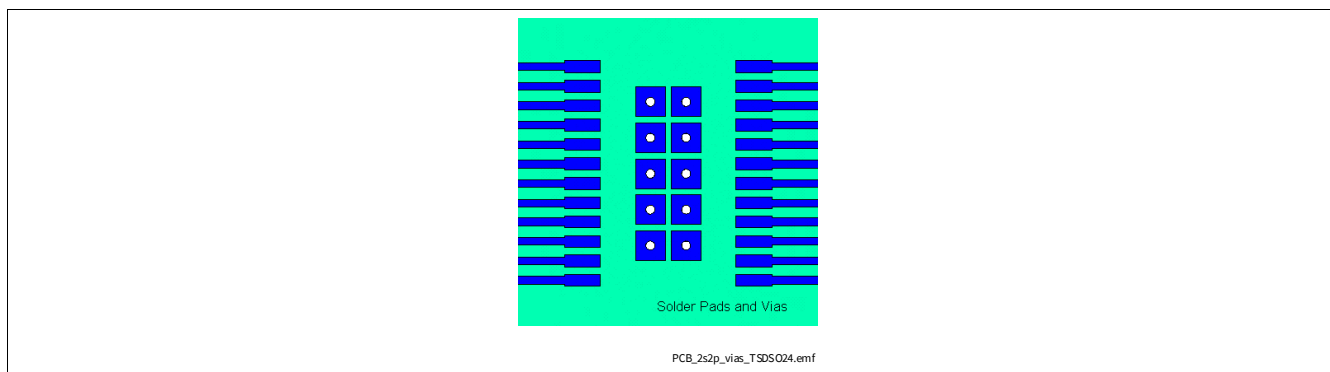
Thermal vias on PCB for 2s2p PCB setup
